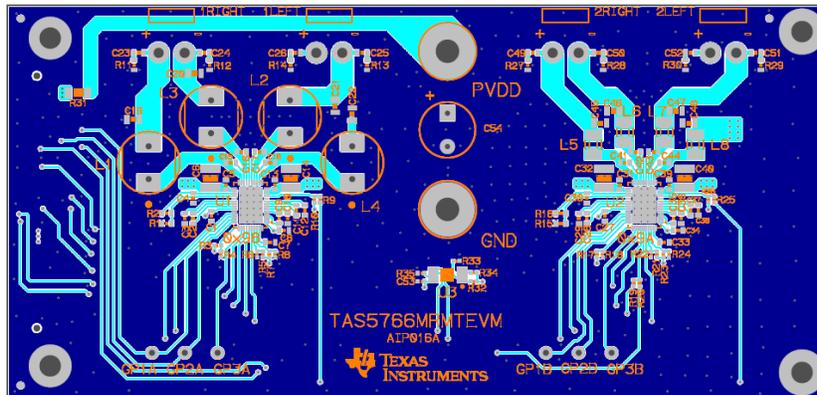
TAS5766MRMTEVM Top Composite Assembly
